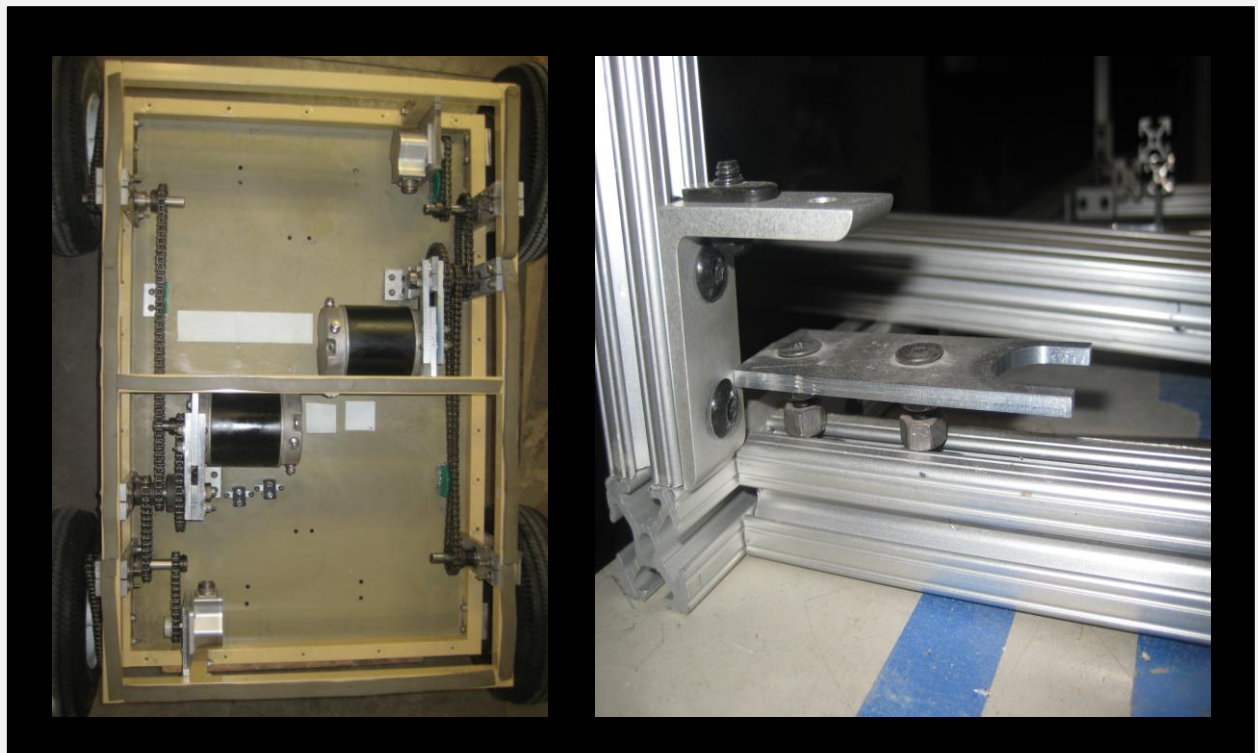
Selected Components of the Mechanical Design. *Left* - Image of the drivetrain section of the chassis depicting differential drive. *Right* - Mount point on the Aluminum T-Slot used for component mounting.
